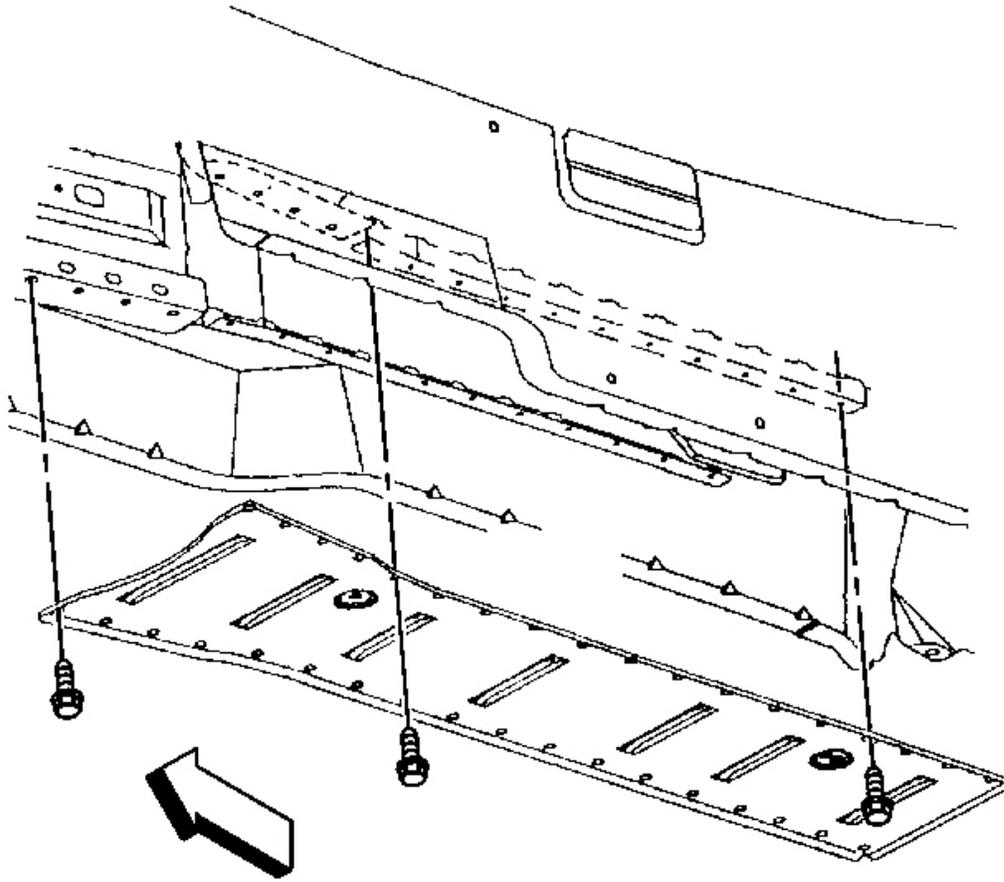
EVAP Pipe Retainer & Chassis Fuel
